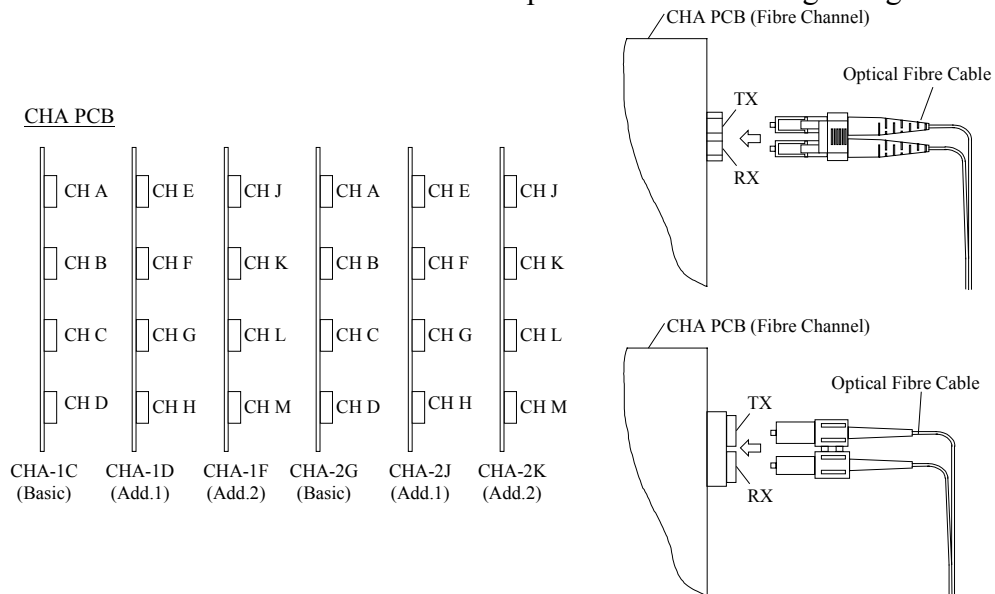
Connection of Optical Fiber Cable
